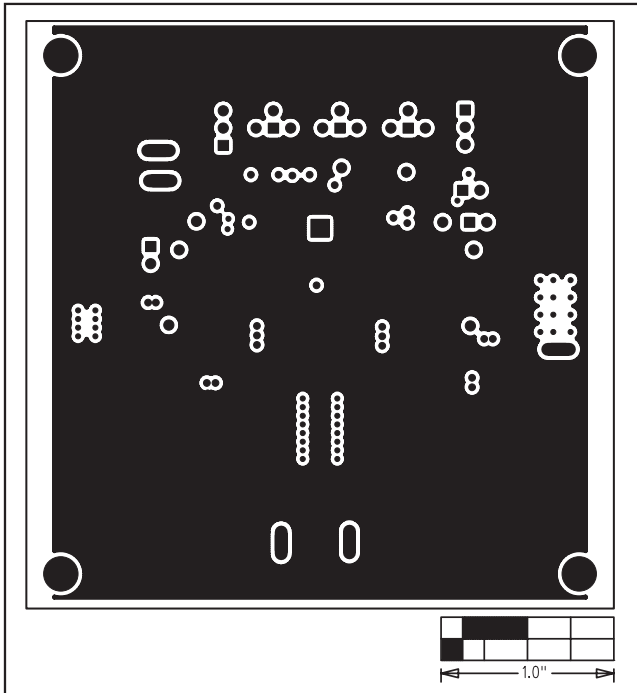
MAX17007 EV Kit PCB Layout—GND Layer 2
